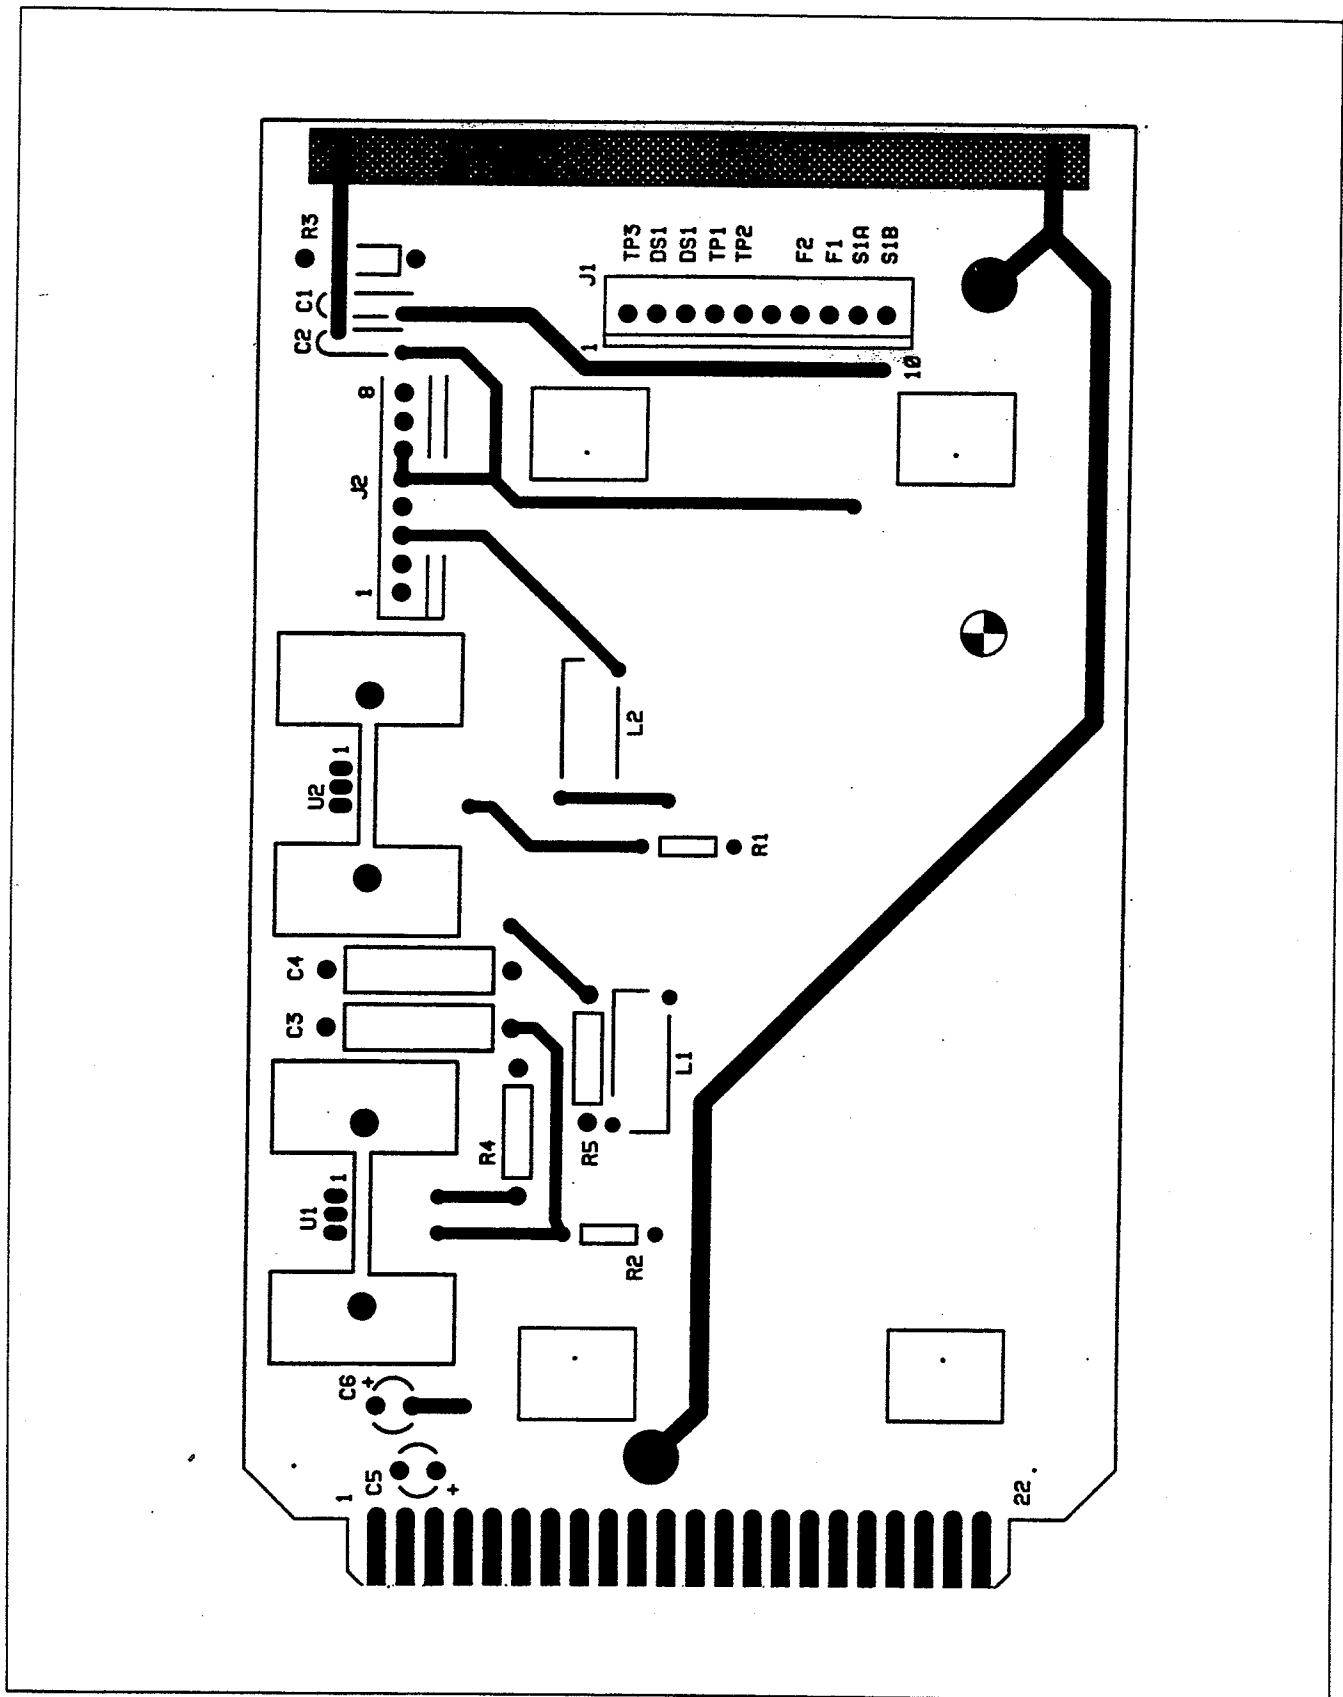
Component locator drawing, RFL 6785P power supply modules
